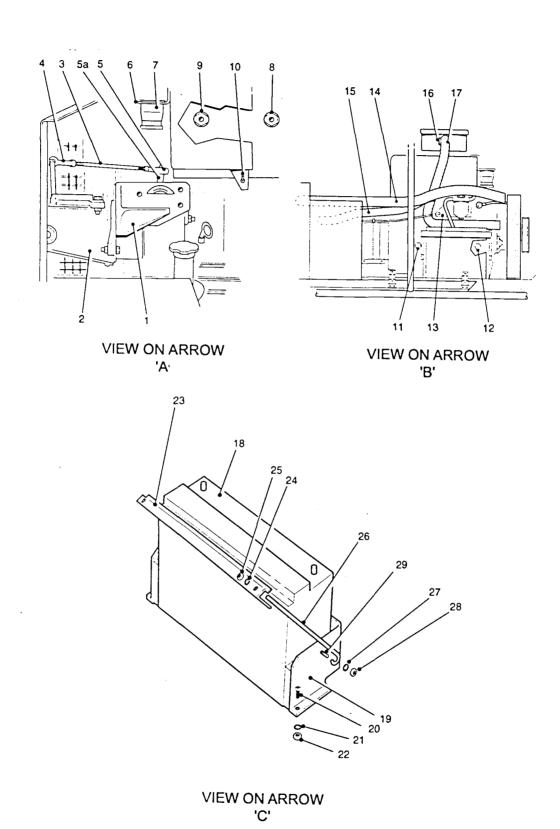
Engine/alternator assembly - views A, B, and C on Fig. 1
